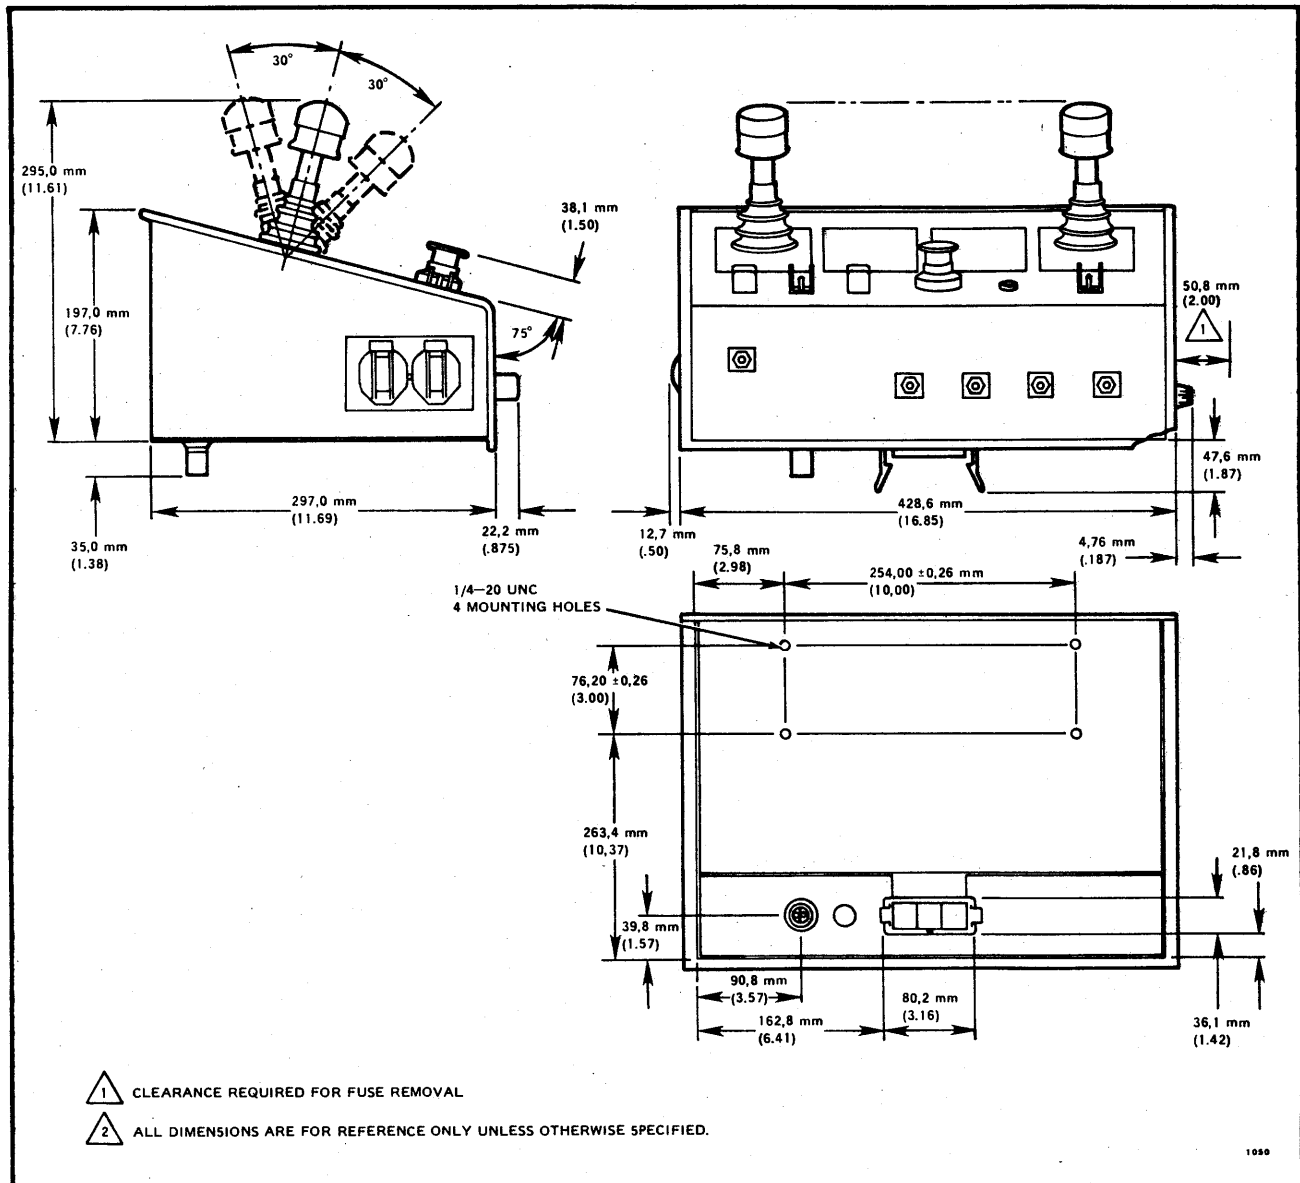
Dimension drawing of the MCP101A in millimeters (inches).
